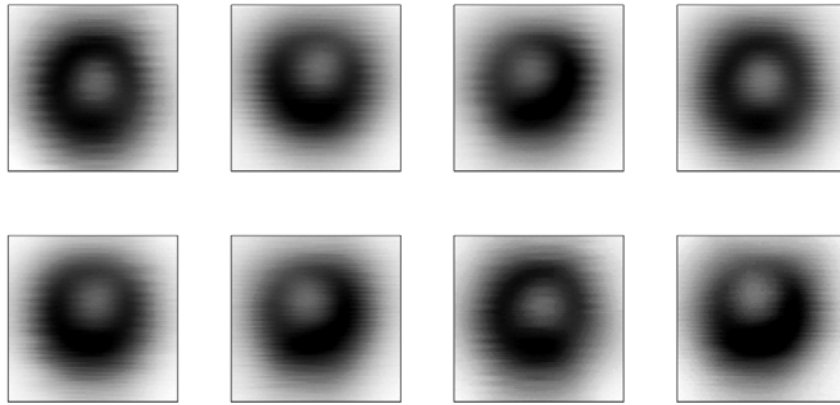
Typical C-scan images of solder joints extracted from Fig. 1.
